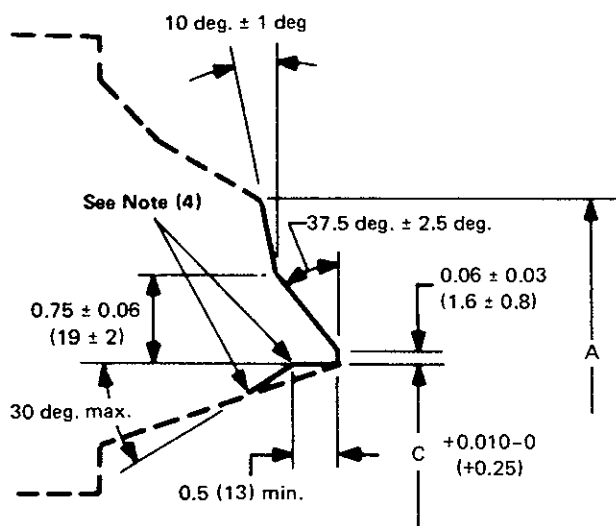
Welding End Detail for Joint Using Continuous Rectangular Backing Ring.
